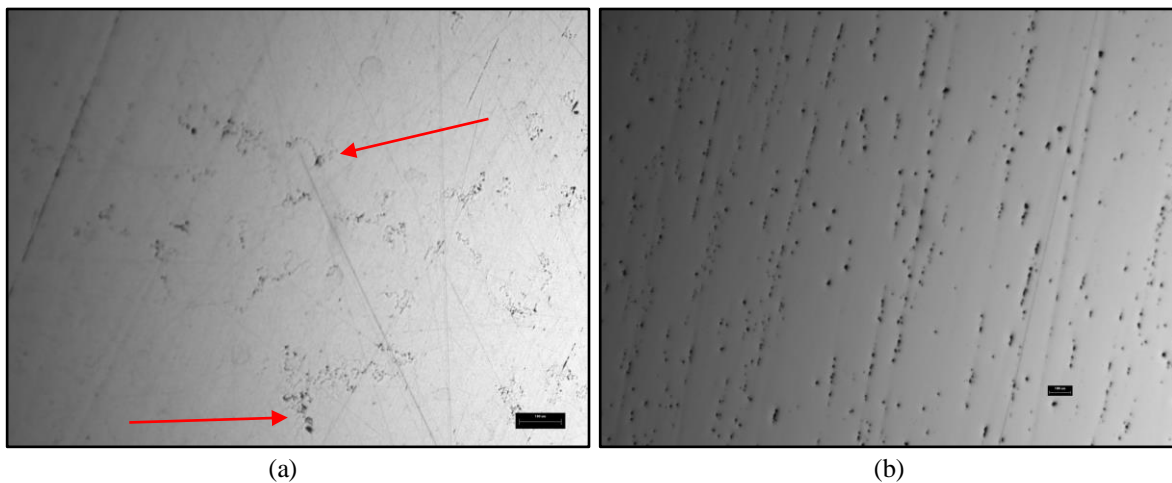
Weld metal porosity in the form of a) macroporosity present throughout the base metal and b) small gas pockets in the weld metal of a 1G GMAW sample.
